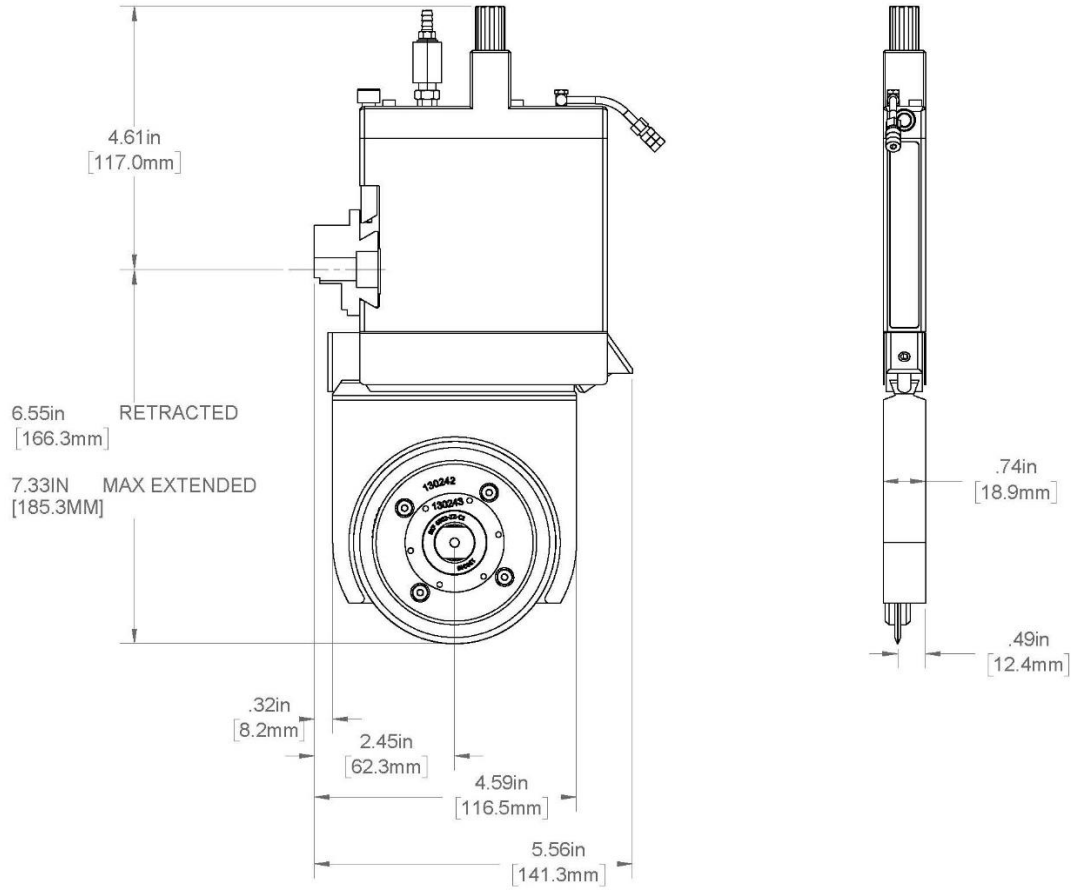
Advantage Series 19 Crush Knifeholder Dimensions
